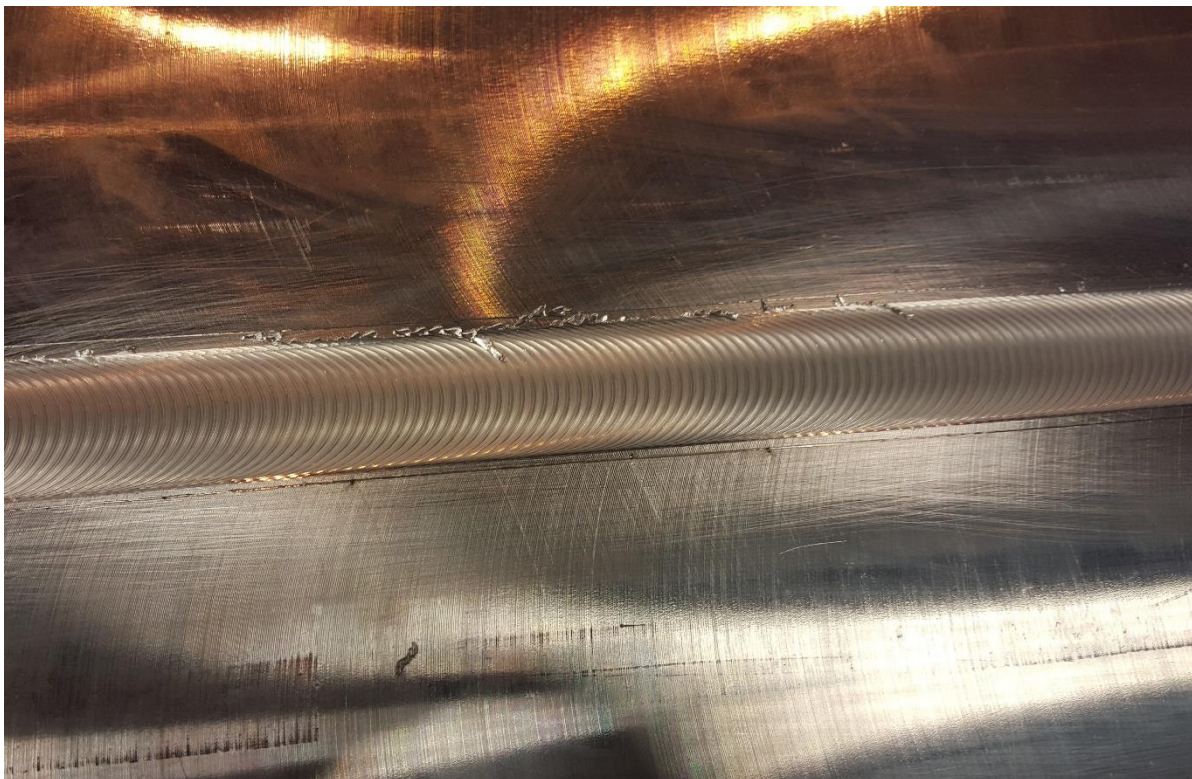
Completed Weld with Scroll Lines Still Present
